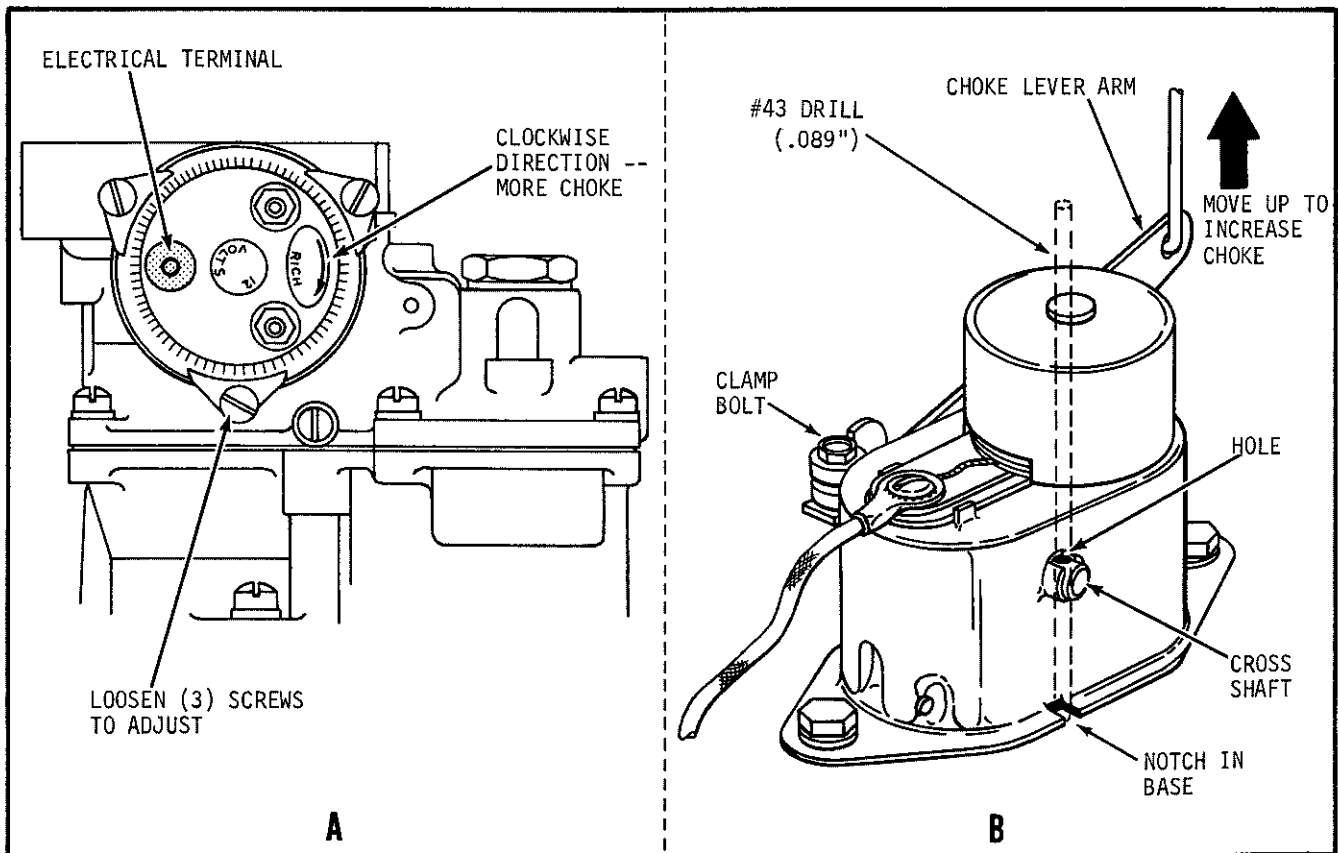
AUTOMATIC CHOKES (A) CARBURETOR UNIT -- (B) MANIFOLD UNIT
